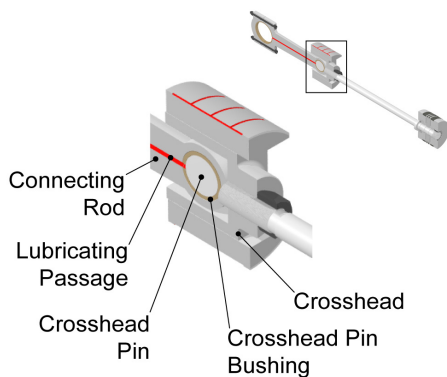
Typical Direct Rod Connection Crosshead Assembly.
